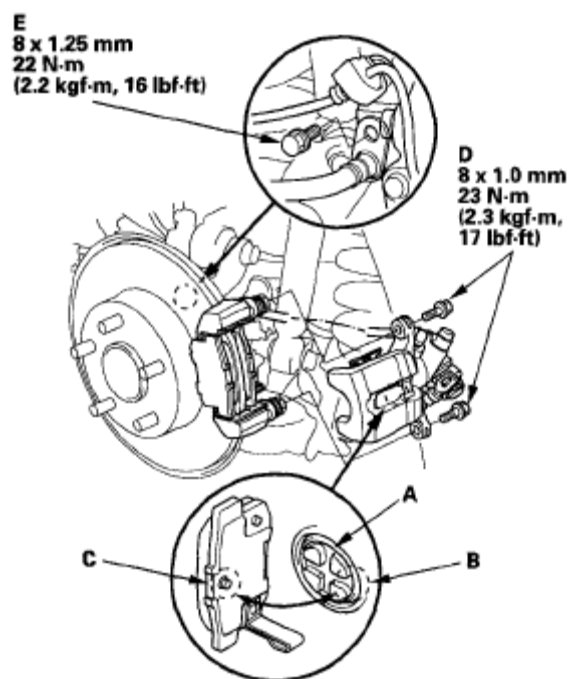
Rotating Caliper Piston Clockwise Into Cylinder
